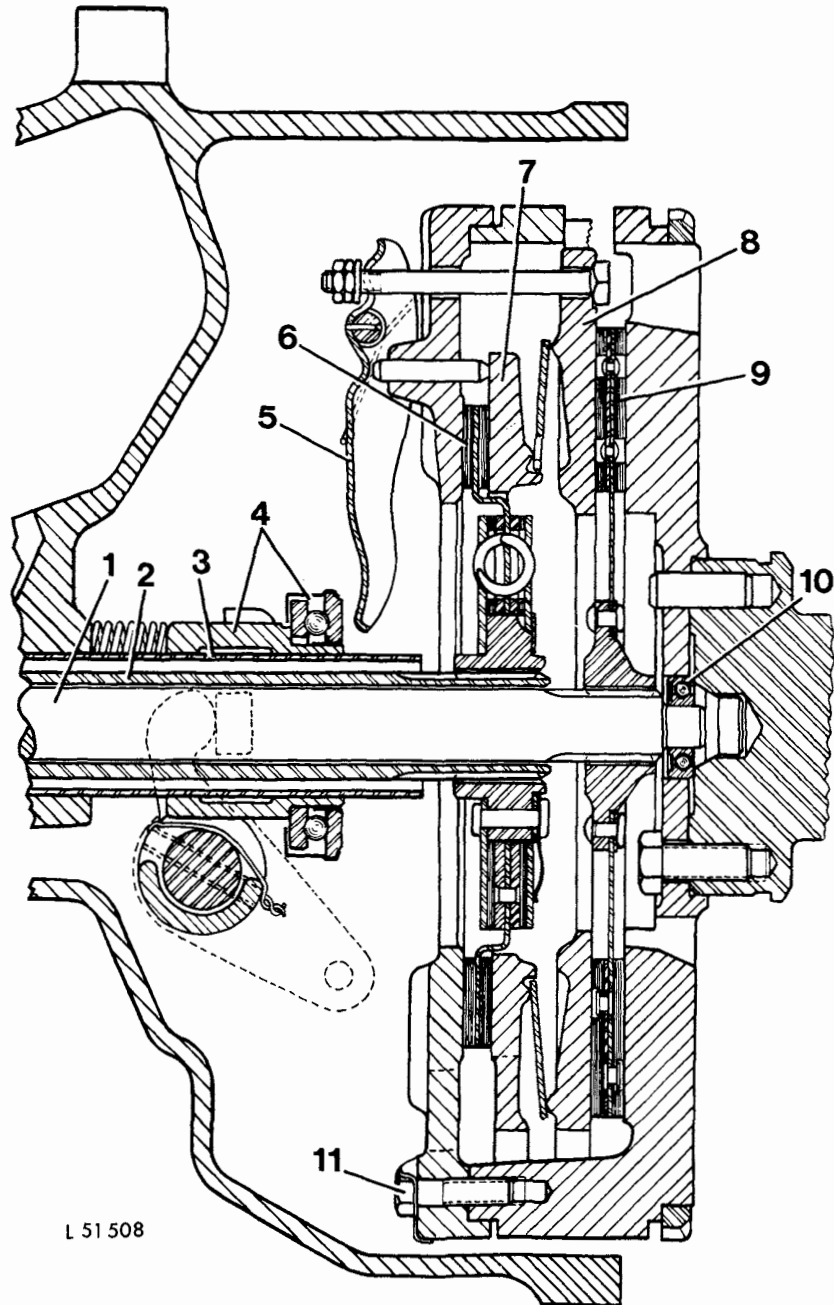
Engine Dual-Stage Clutch, Sectional View
